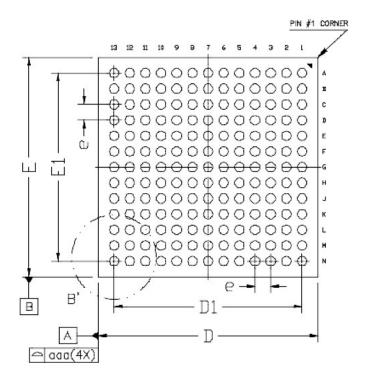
169-pin FCBGA 14 × 14 Package Mechanical Drawings — Bottom View
